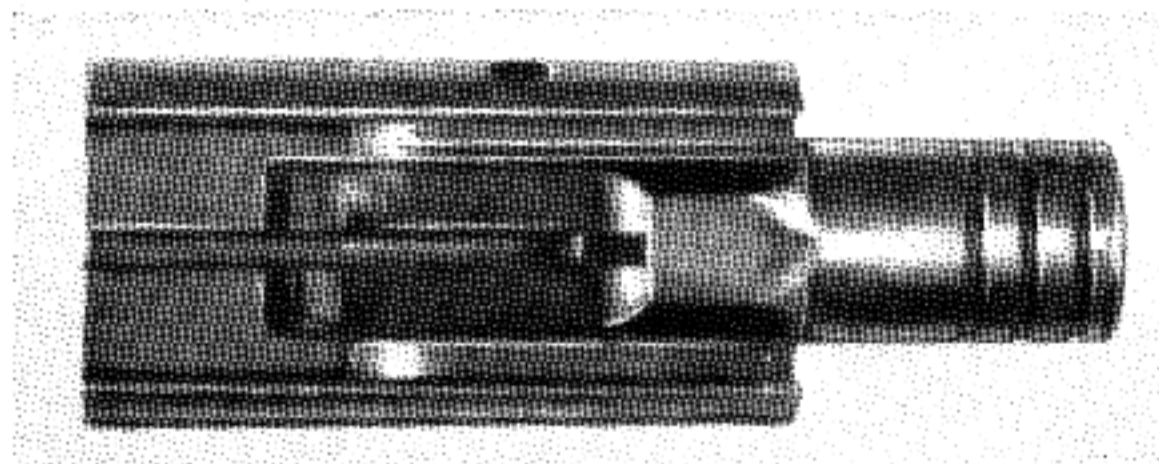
Japanese Caseless 40-mm HO-301. Bottom view of bolt.
